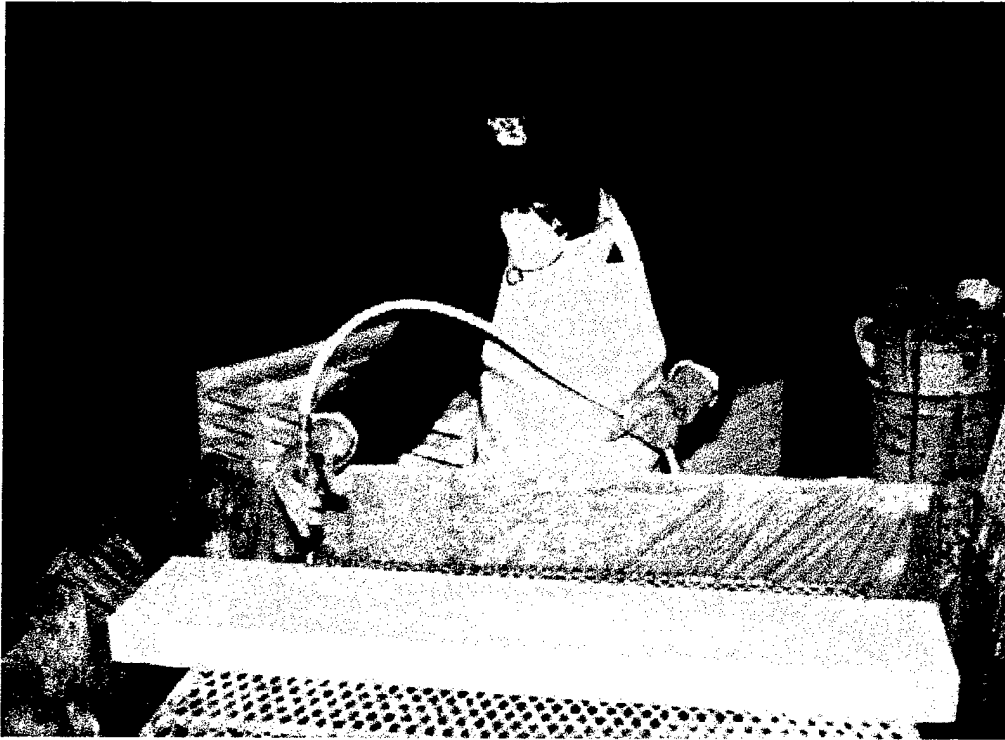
Drilling Holes in Vacuum Cast RCF
